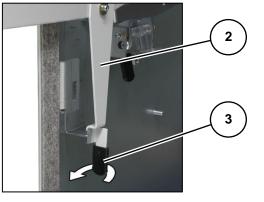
Pushing the main handle downwards Fig. 538: Engaging the latching rod to end position
